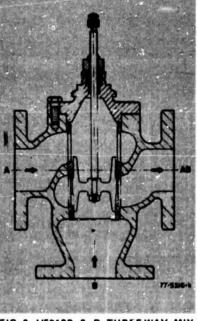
V5013B & D THREE-WAY MIX-ING VALVE
